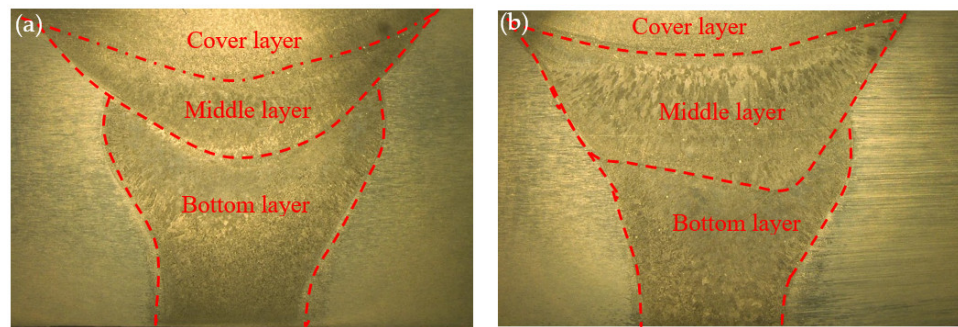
Cross-sectional morphologies of the two welded joints. (a) ER5356 welded joint, (b) ER5087 welded joint.
